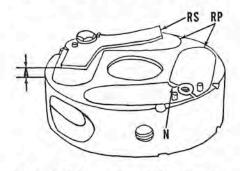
Intermediate main bearing showing inlet reed valves, Reed petals (RP) are right and left hand units. When installing reed petals, place the reed with the cut-out notch (N) on the left as shown. Adjust free height of reed stop (RS).
